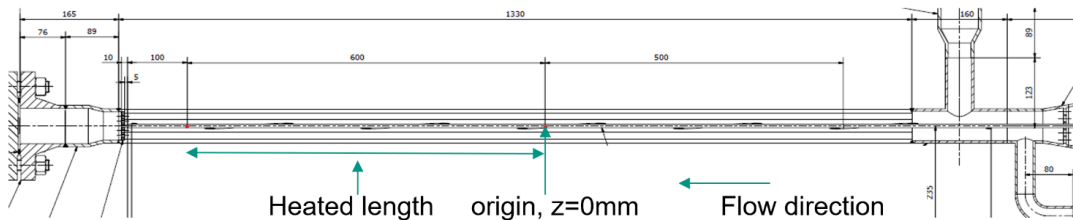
CAD drawing of the test section and origin of the used coordinate system [1].
